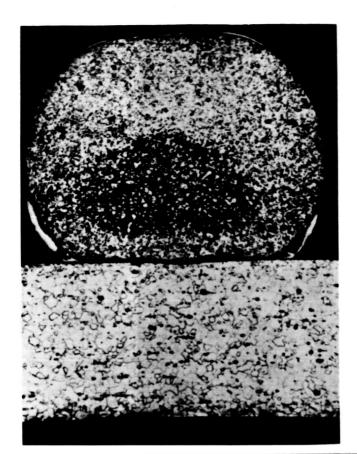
Weld joint 1.3. JPL 2; gold plated Kovar wire to Inco ribbon; not sterilized; 150x magnification; Carapella + nitric-acetic etch (02325).
